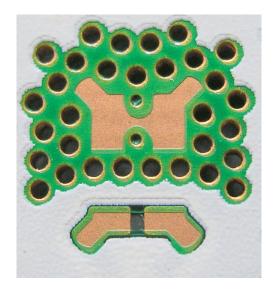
Solder pad layout for LUXEON Rebel PLUS.
